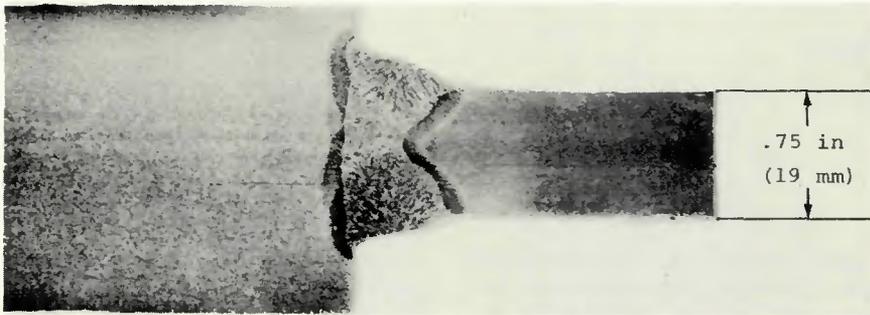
Weld joint used to produce uniform heat-affected zone (left side)
